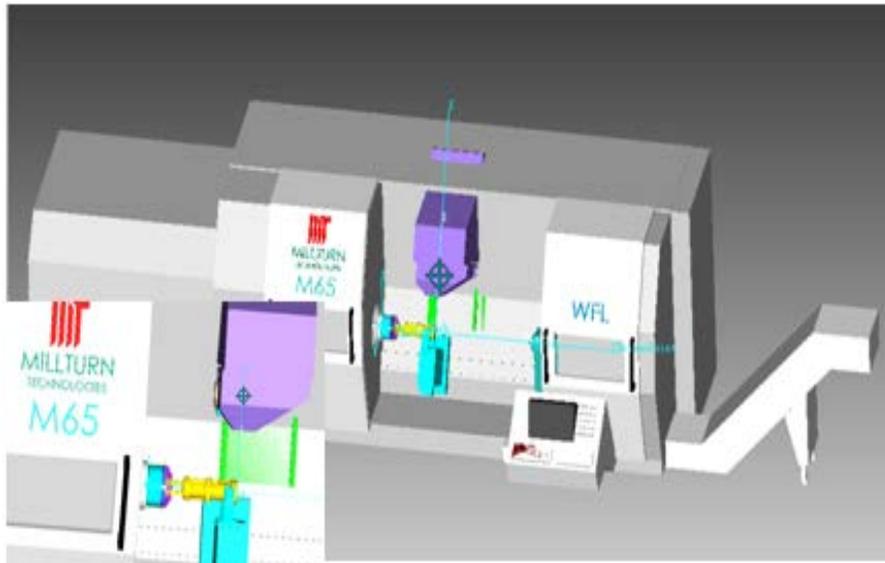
Simulation platform of WFL M65 turning-milling complex machining
